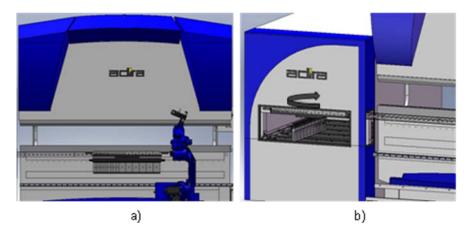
ATC; a) Tools transporter placed on press-brake front; b) Tool inversion.
